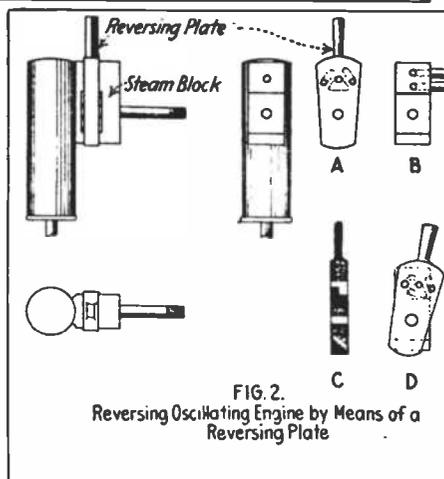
Reversing Oscillating Engine by Means of a Reversing Plate
